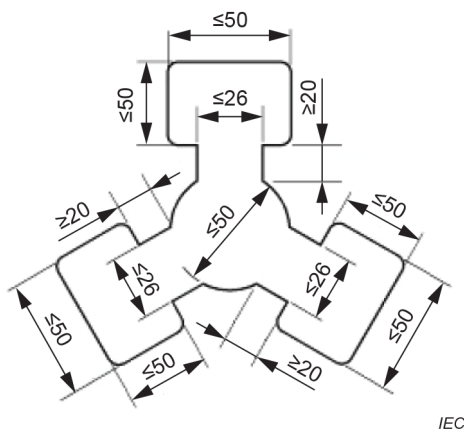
Example – Opening sizes ≤ 50 mm, constriction ≤ 26 mm
